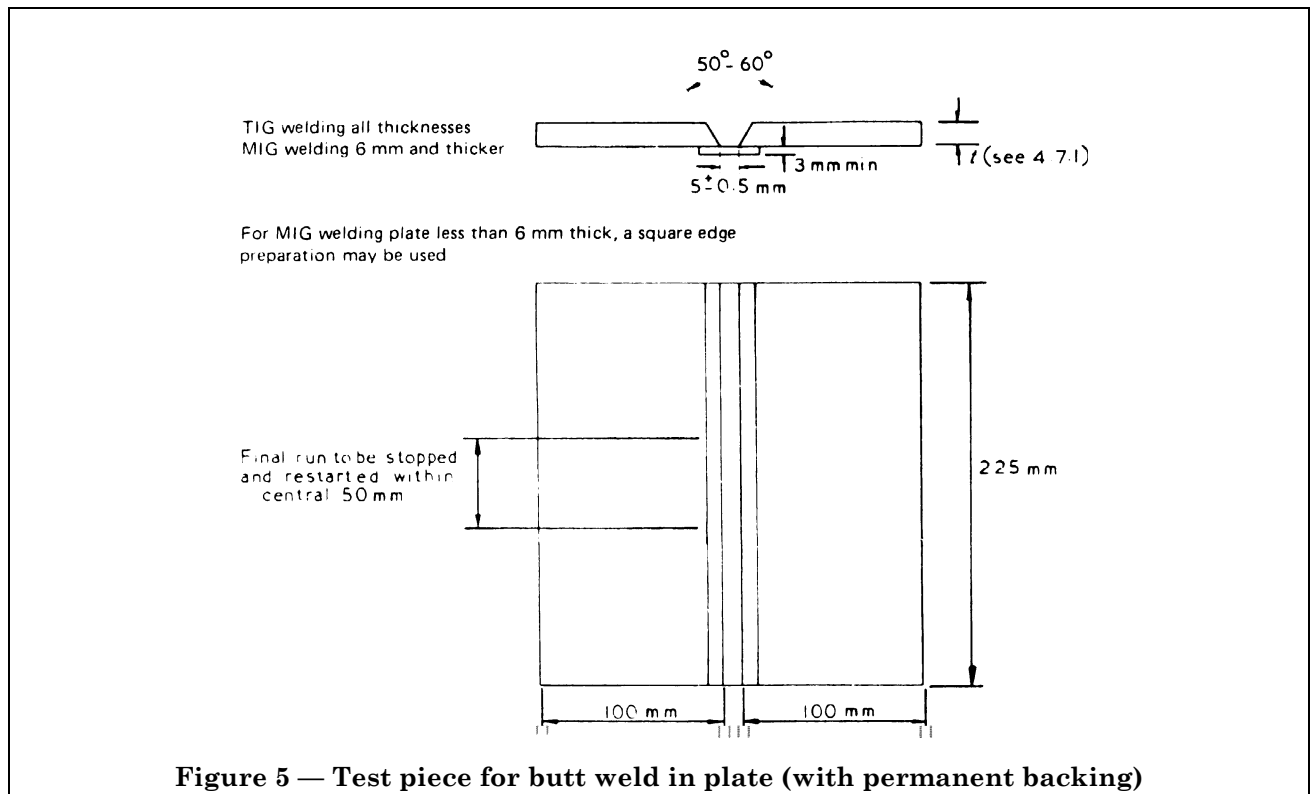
Test piece for butt weld in plate (with permanent backing)
